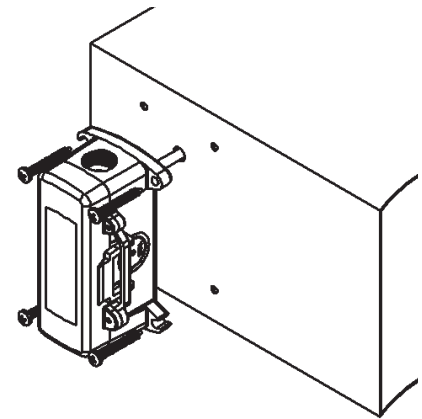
BAPI-Box (BB) Enclosure Mounting Holes, Rotate 90° for Horizontal Mounting
